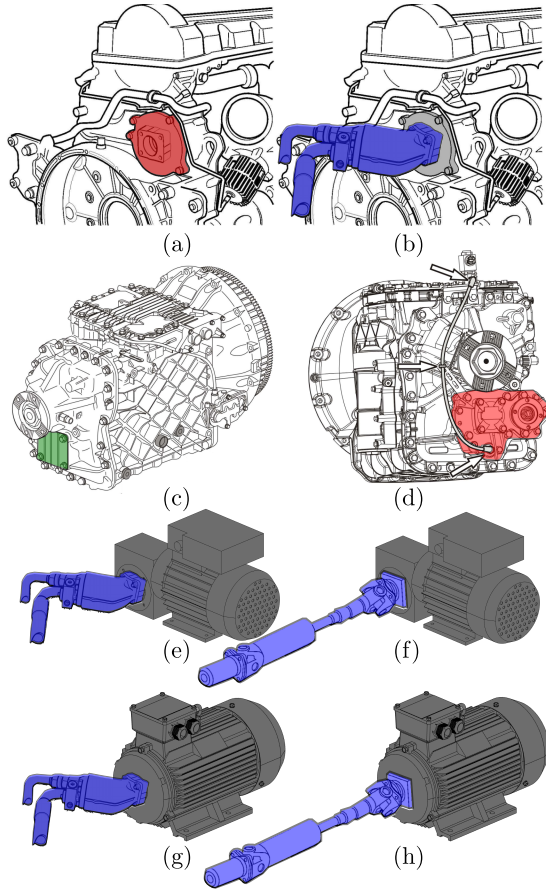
a) Diesel engine rear PTO mount; b) diesel engine with mounted hydraulic pump; c) Transmission with direct PTO mount; d) transmission with geared PTO [3]; geared ePTO propelling hydraulic pump e) and universal joint shaft f); direct ePTO propelling hydraulic pump g) and universal joint shaft h).
